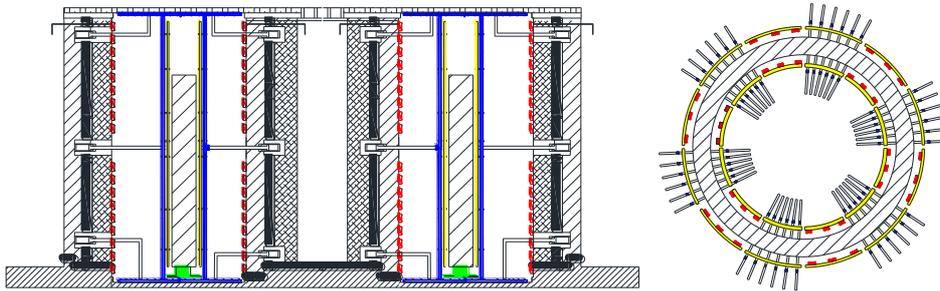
The two-dimensional model of the optimized large cylinder induction heating device
